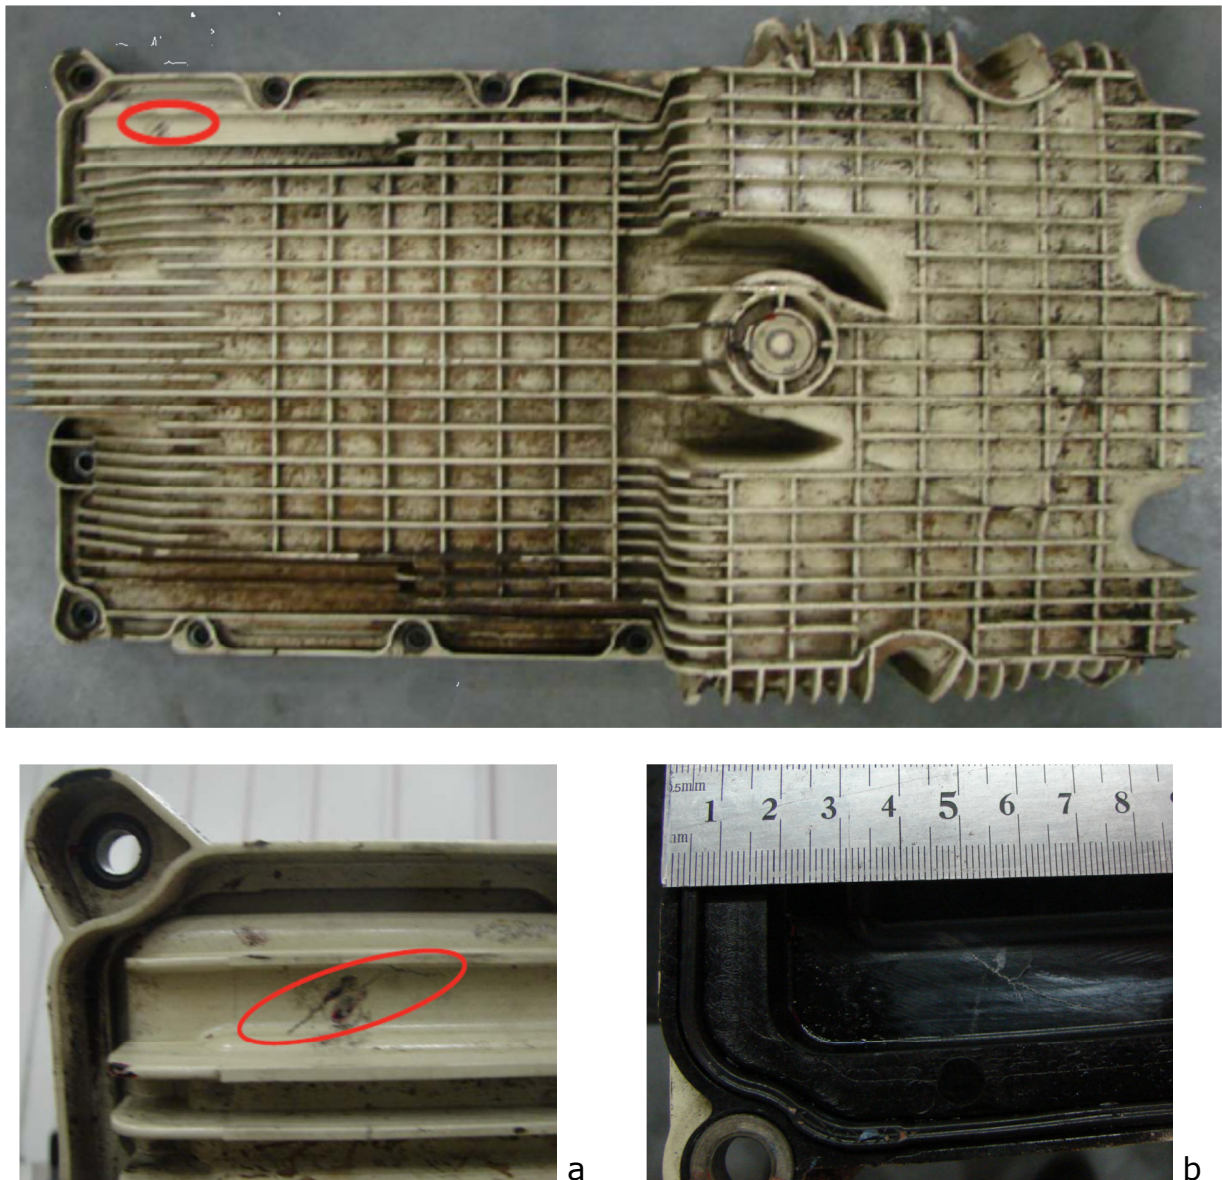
Thermoplastic oil pan crack failure, a) outer side, b) inner side [34]
